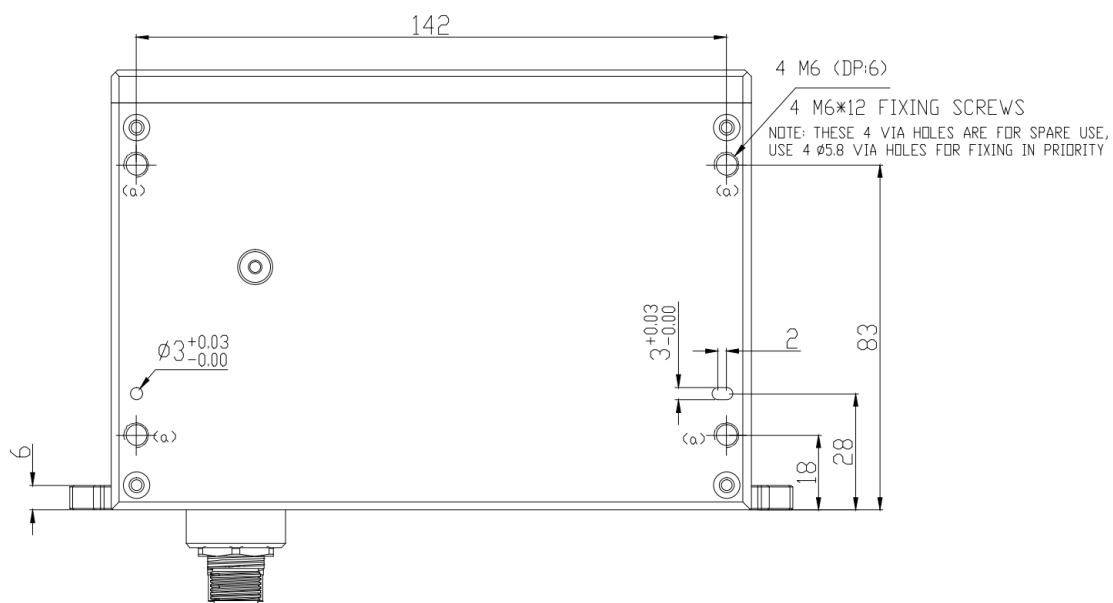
CH256X1 Lidar Base Dimensions (unit: mm)
